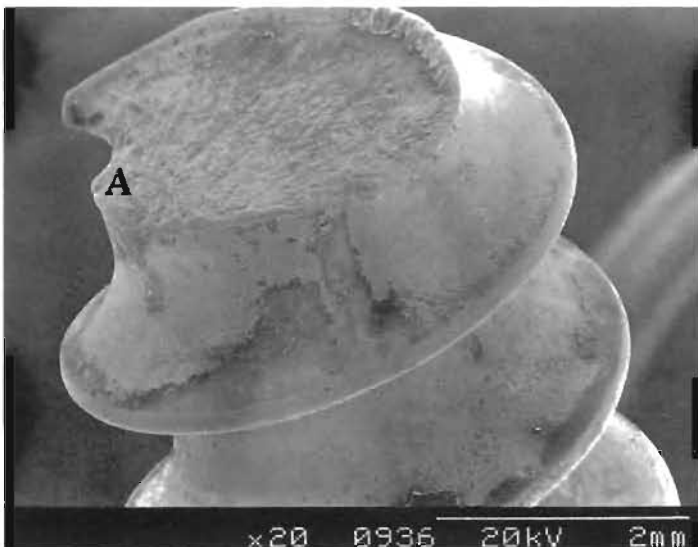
Macroscopic fracture cross section of the cortical screw which suffered initial failure.
